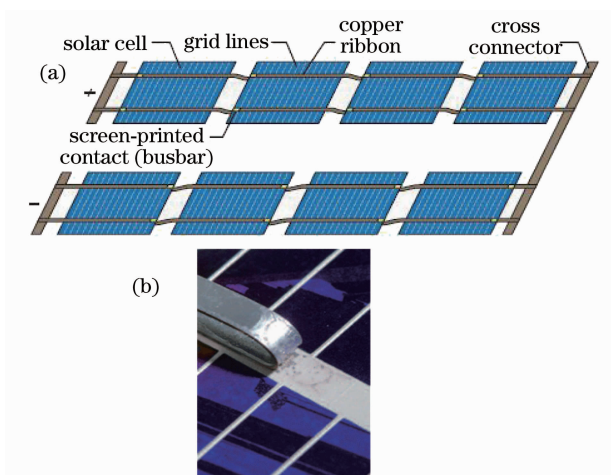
(a) Schematic setup of solar strings; (b) real image of laser soldering strings on solar cell (source: Fraunhofer ILT, Germany)
